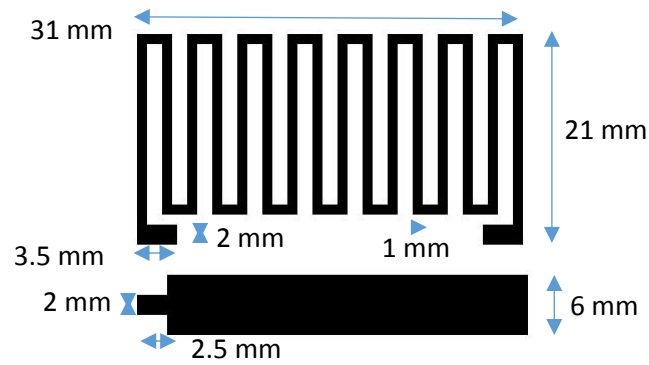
Pattern of the silver ink dispenser printed on the interface layer on fabric for the fabrication of proximity controlled colour changing fabric and the dimensions of the heater and the proximity sensing element
